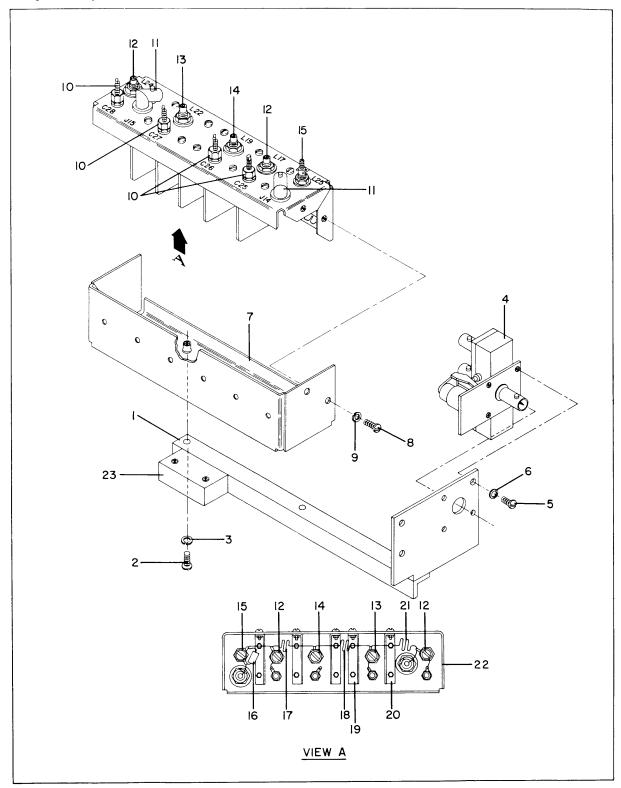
163 Mc Filter and Bracket Assembly, Exploded View
